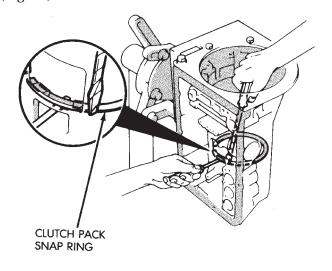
Removing Second Brake Clutch Pack Snap Ring
